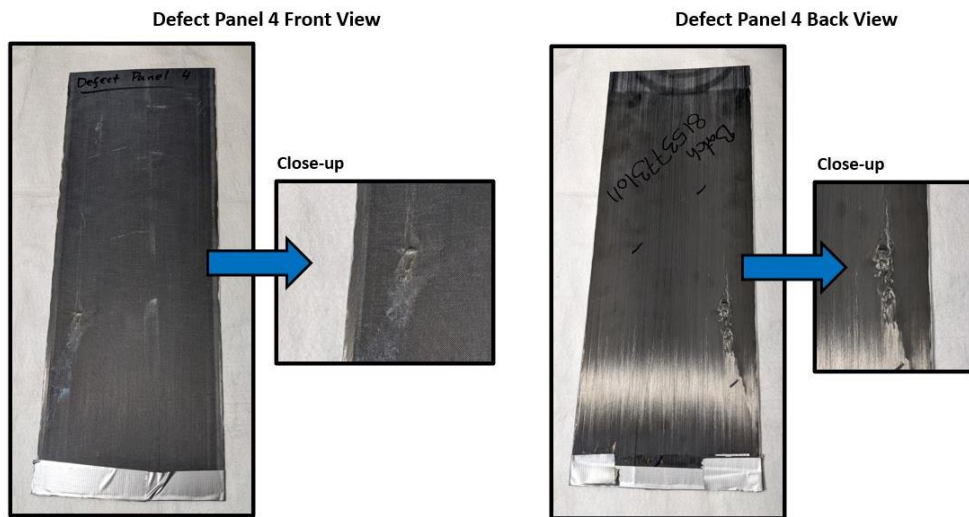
Defect Panel 4 photographs with defects highlighted.
